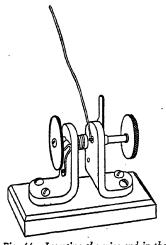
Inserting the wire end in the split mandrel of the coiling machine
